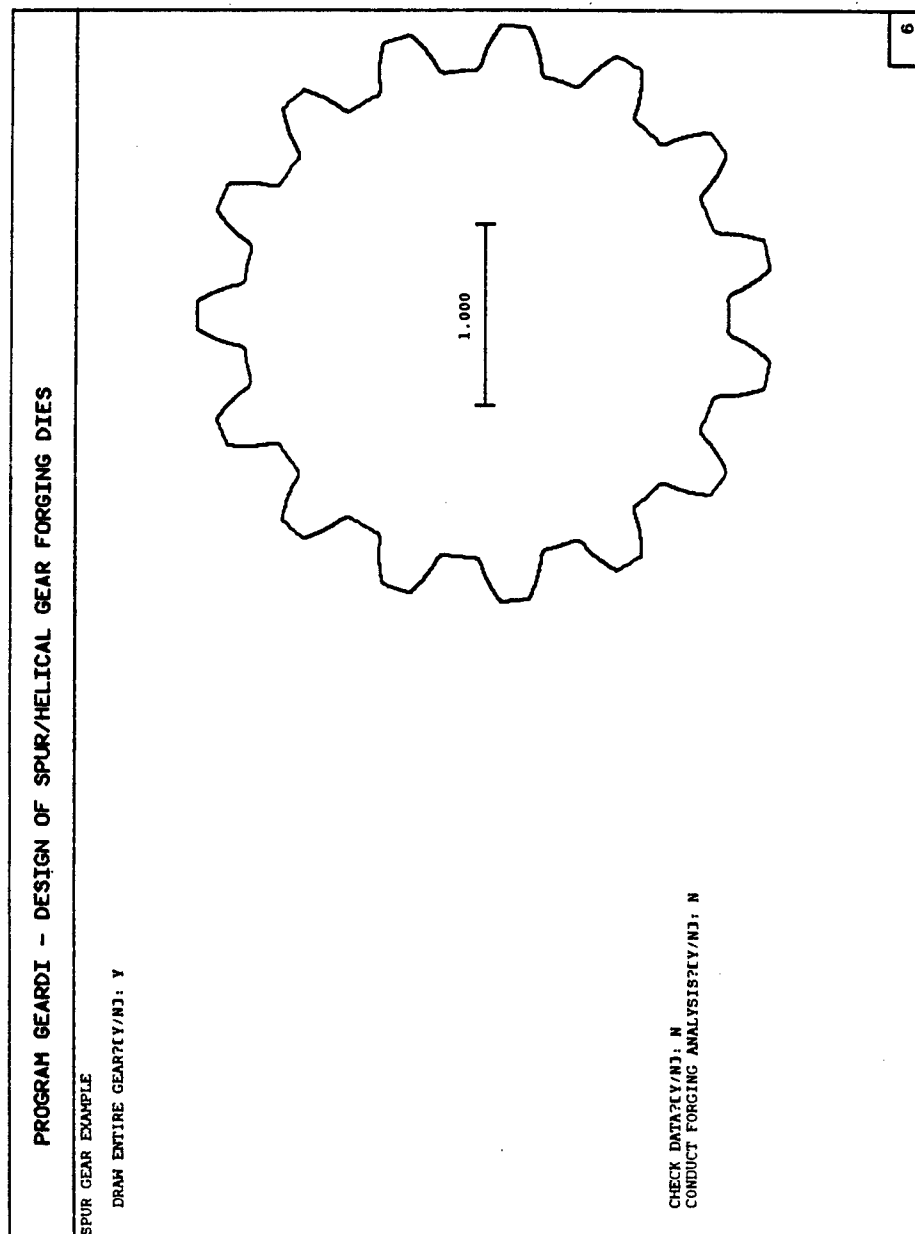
Spur Gear Example; Entire Gear Form Using No Clearance on the Mating Gear
